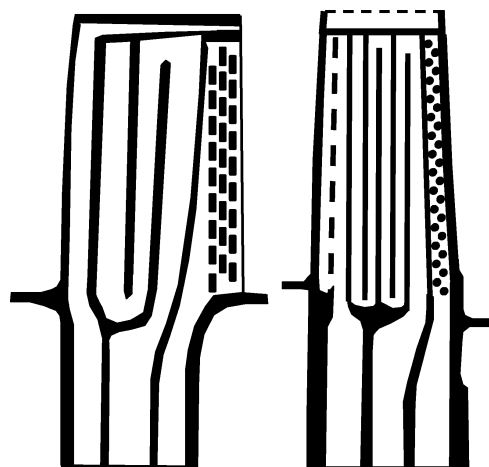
Exemplary blade internal cooling circuits for flat and squealer tip designs.
